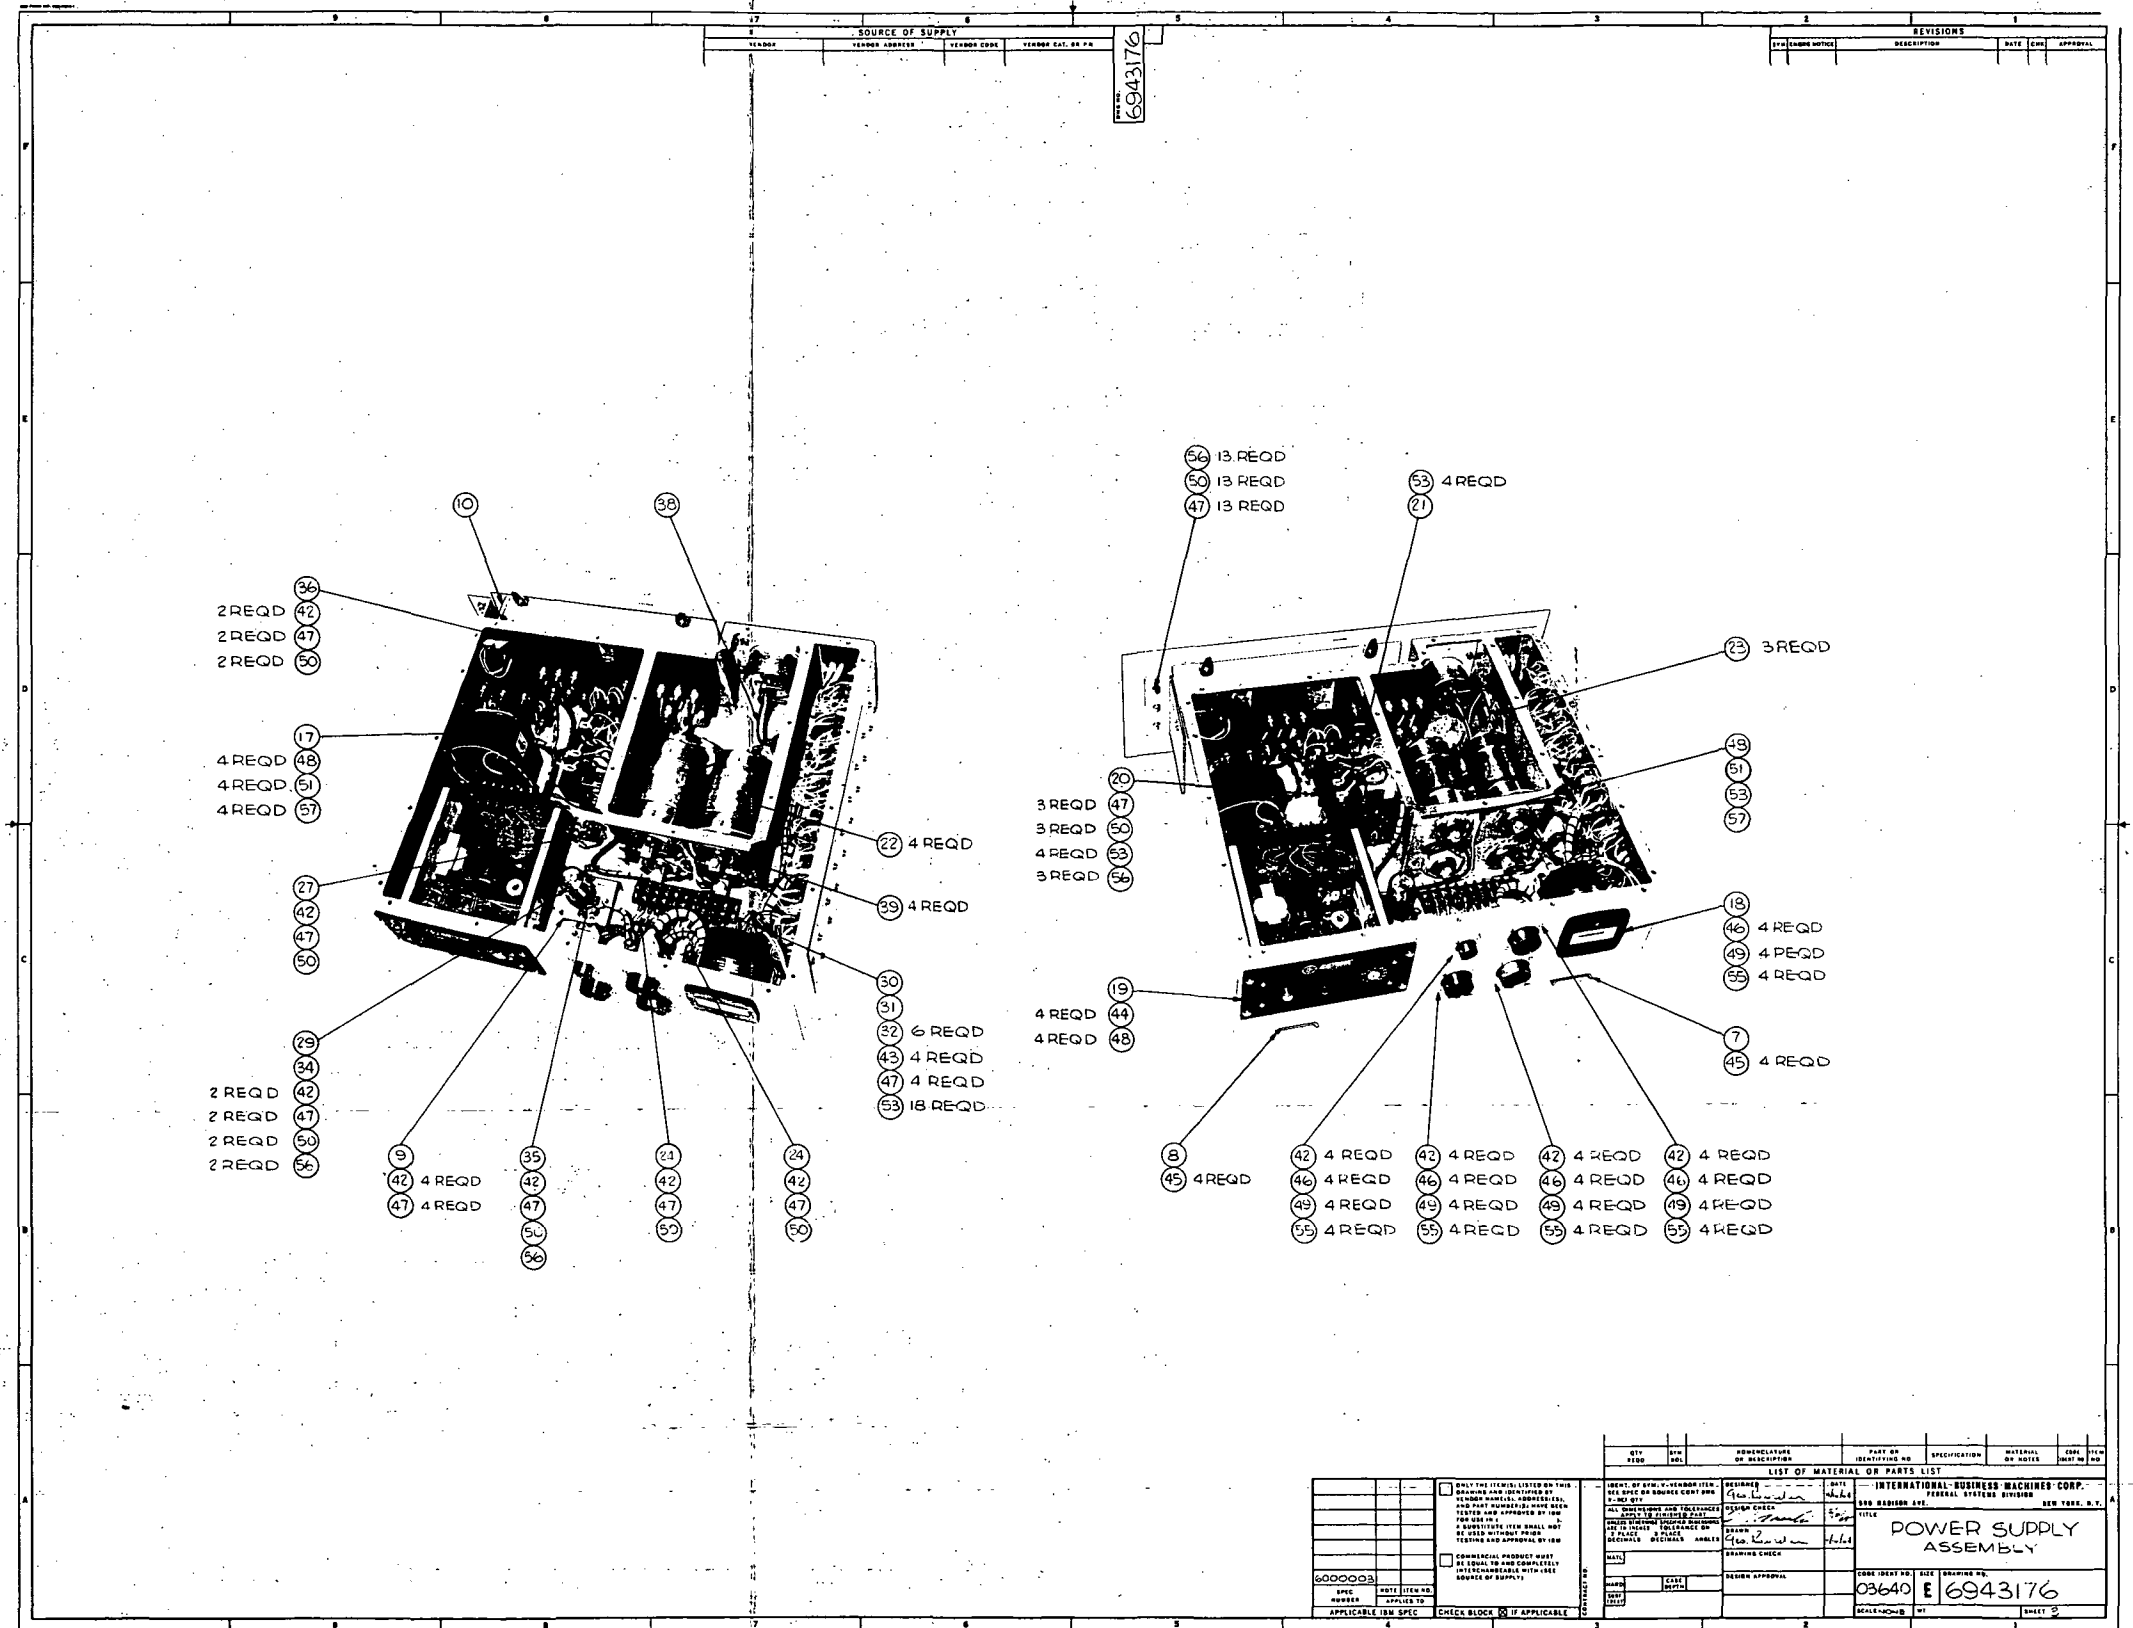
Temperature Modulator Power Box Assembly (6943176) Assembly Diagram (Sheet 1 of 3)
